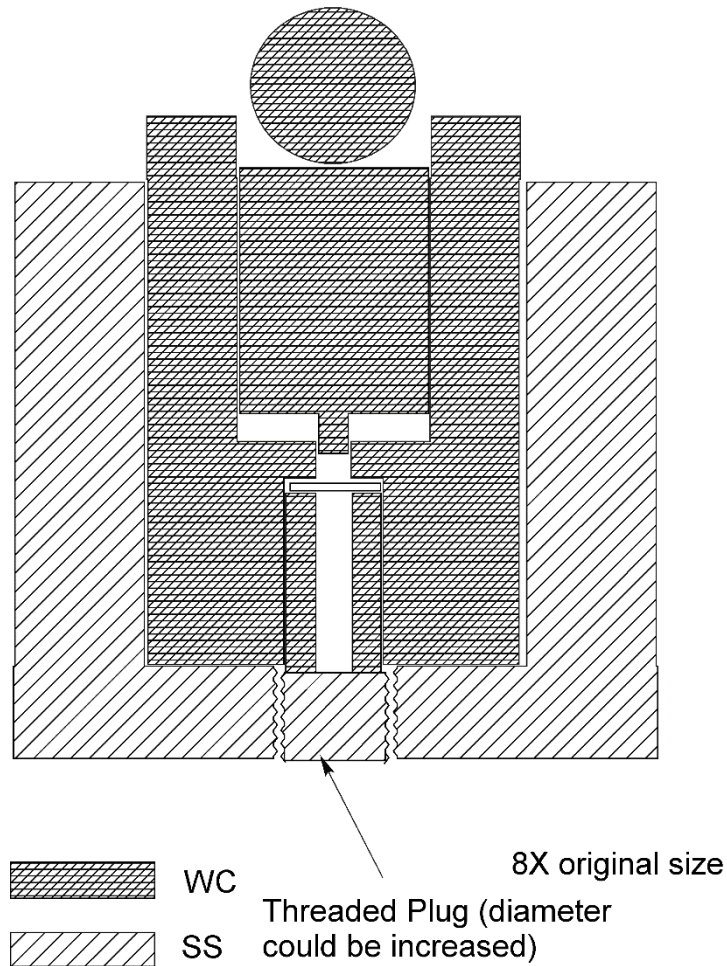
Schematic of Shear Punch Test fixture for 3 mm x 0.25 mm TEM samples using a 1 mm punch.
